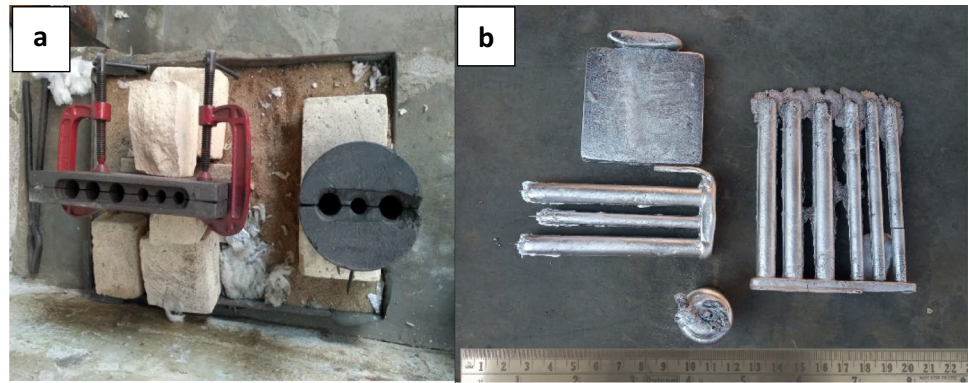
Furnace used for making hybrid composite (a) graphite-coated cast iron finger dies (b) Casted specimens
